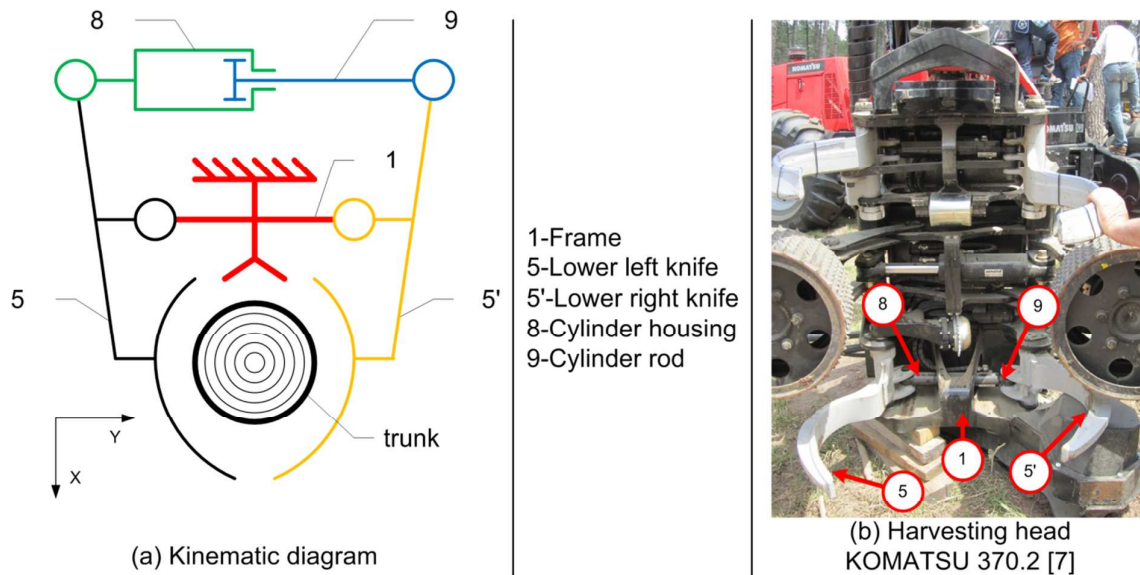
Lower knives moved by a concentric gripping mechanism with single actuator.
